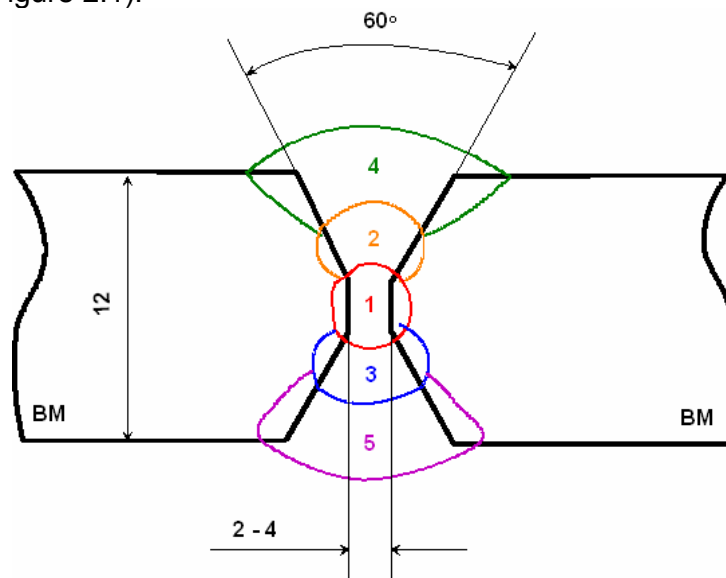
Welding passes sequence (all dimensions are in mm; BM = base material).
